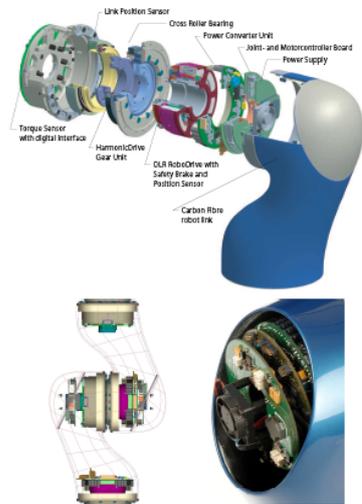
DLR – KUKA LWR (light weight arm) – Expanded CAD model
